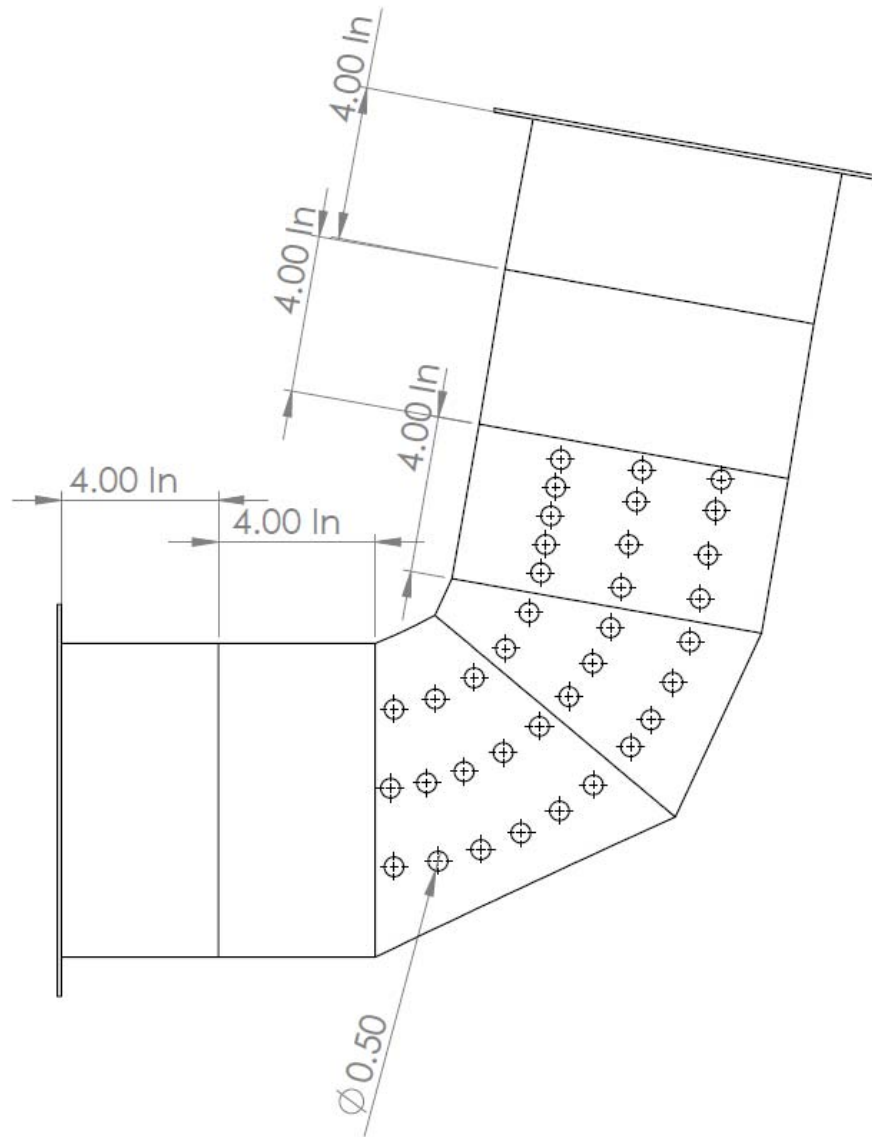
Right Orthographic SolidWorks Drawing of Heat Exchanger.
